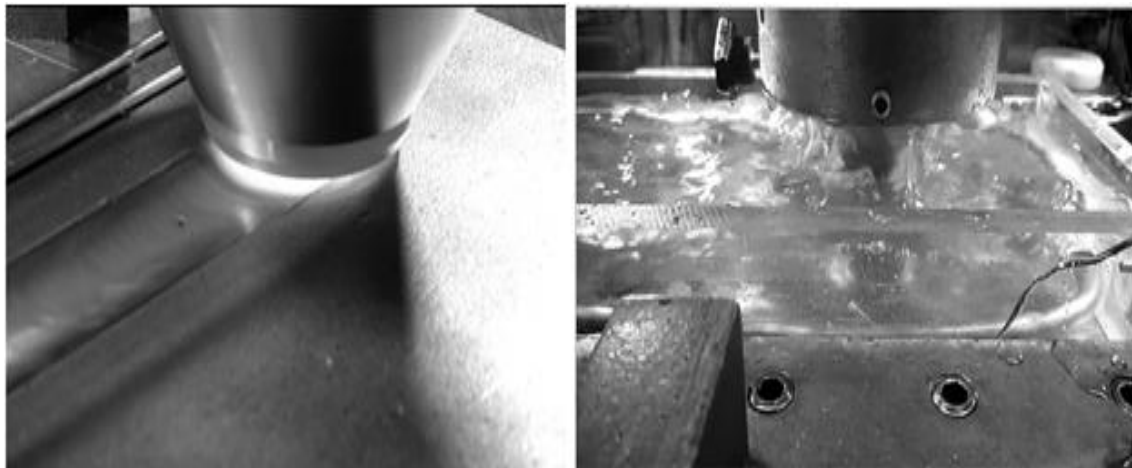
Schematic representation of underwater friction stir welding
